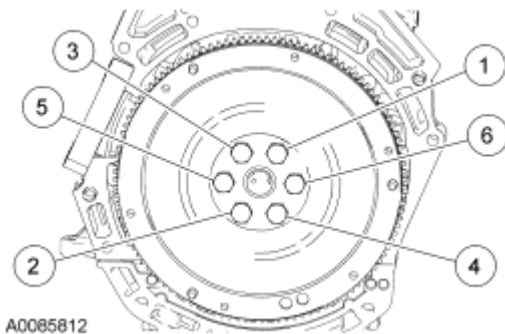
Identifying Flexplate Bolts Tightening Sequence
